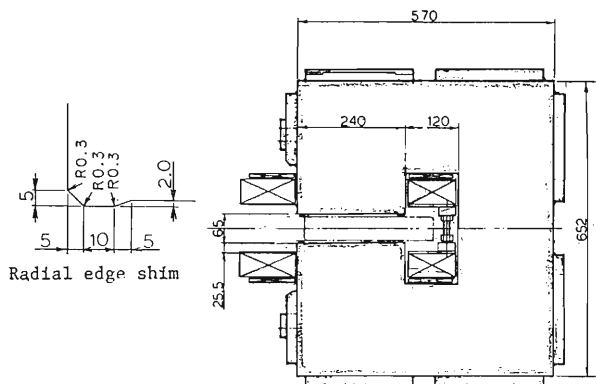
Cross-sectional view of a prototype dipole magnet.
